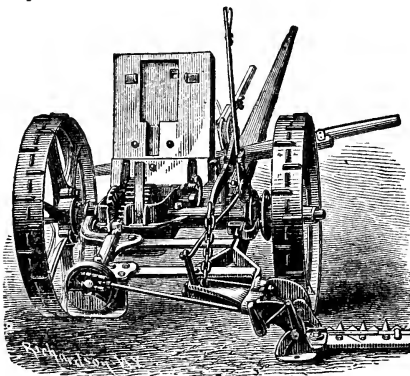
Osborne Mower with Box turned up to show Gearing.
